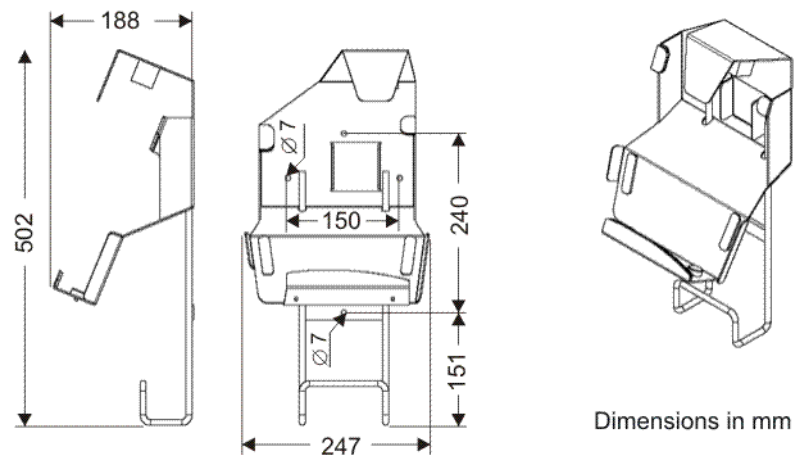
Dimensions and drilling locations for smartPAD holder
